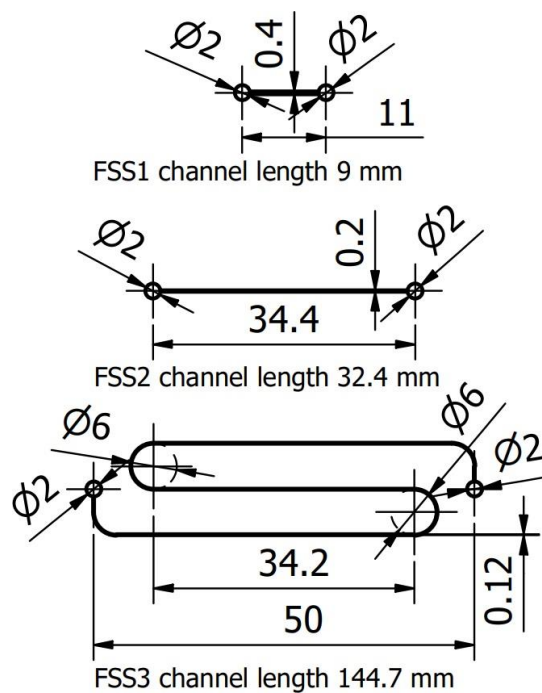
ISO technical drawing of the resistor (dimensions in mm).
